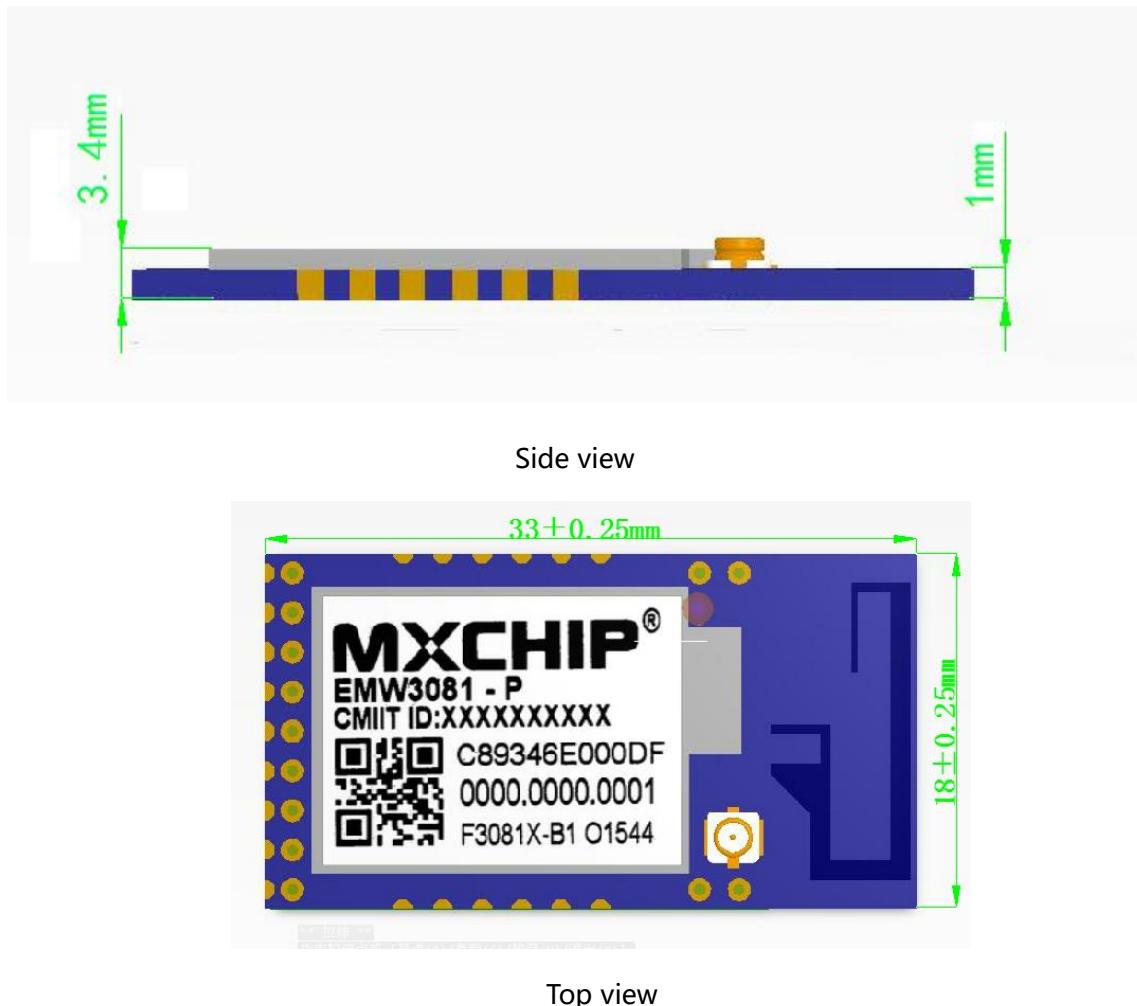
EMW3081 Mechanical Dimensions (Unit: mm)
